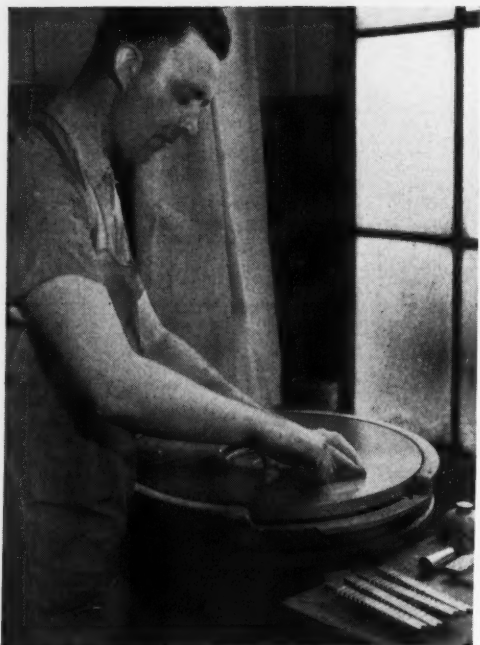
Lapping Mold Caps, Using a Power-Driven Cast Iron Rotary Lap Containing Circular Grooves to Hold the Lapping Compound
